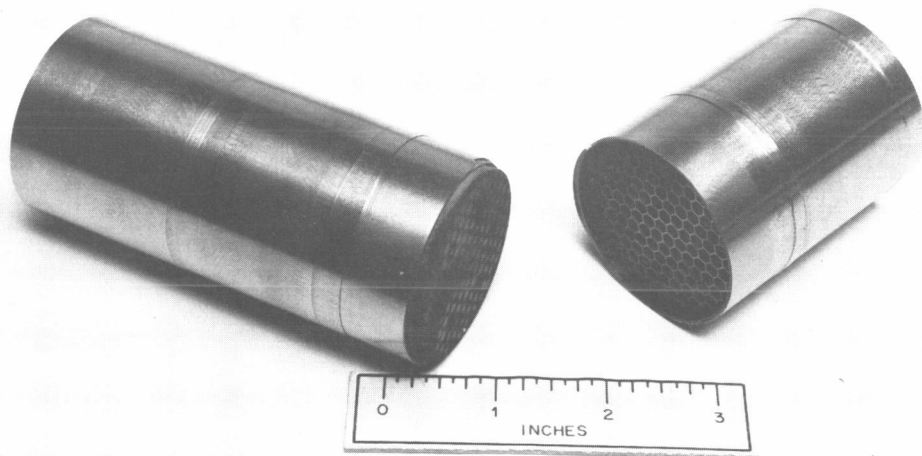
BAND ATTACHMENT ASSEMBLY PRIOR TO DEPOSITION.
